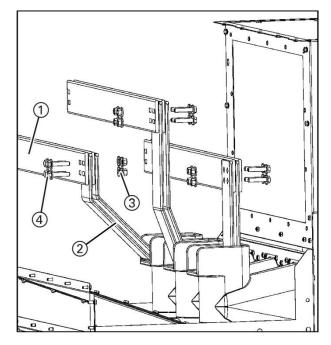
Assembly of 2500 A busbar, feeder ≤ 2500 A, Ur = 24 kV, bolted joints at the end panel
